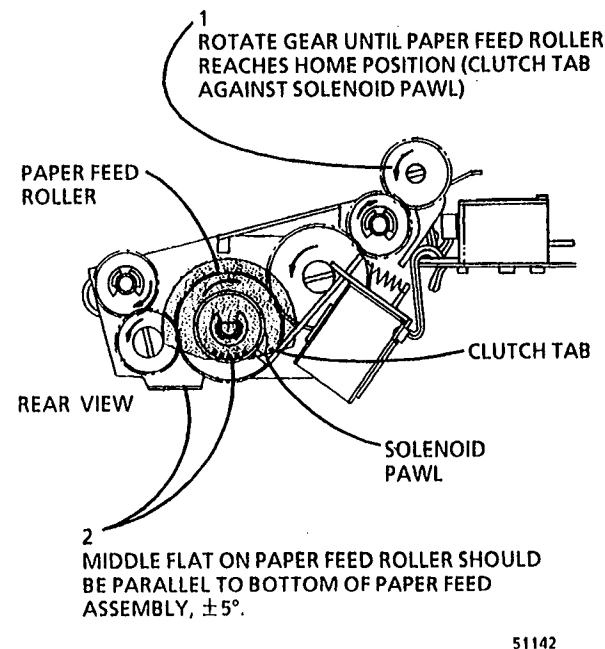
Checking the Paper Feed Roll Home Position Alignment
